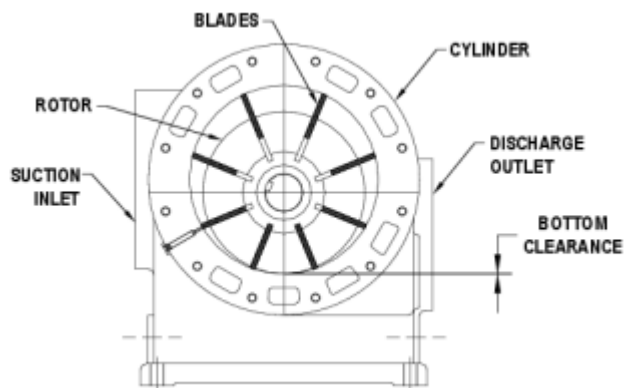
Illustration of bottom clearance between rotor and cylinder (Low Pressure models).
